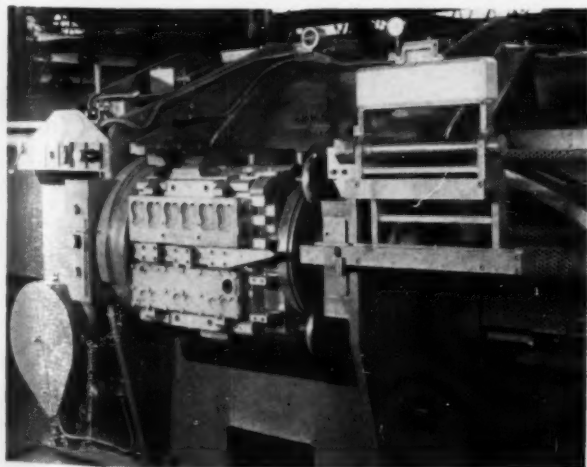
FIXTURE OF BROACHING MACHINE IN POSITION TO BROACH TWO HEADS AND LOAD TWO OTHERS
